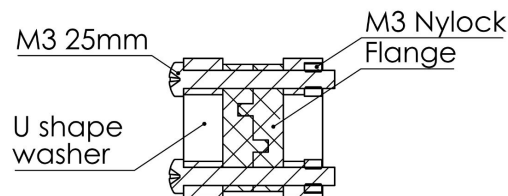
Cross section diagram of two mated flanges held by bolts passing through mild steel washers. Nylon locking nuts are used with stainless steel M3 bolts.
